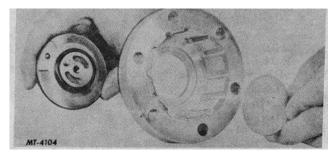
Removing Control Assembly and Disc from Clutch Body
